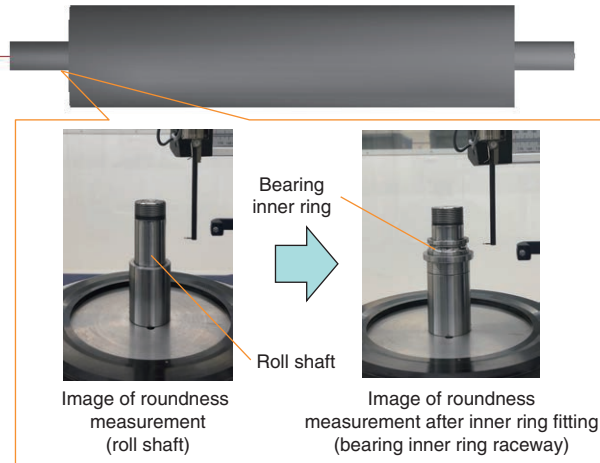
Roundness measurement of roll shaft and inner ring raceway
